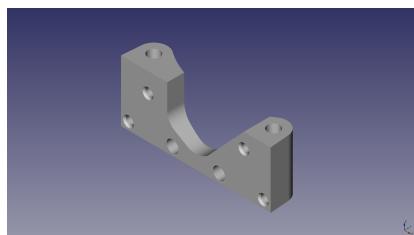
Begonia 3D Printed Y Rod Mount Render
